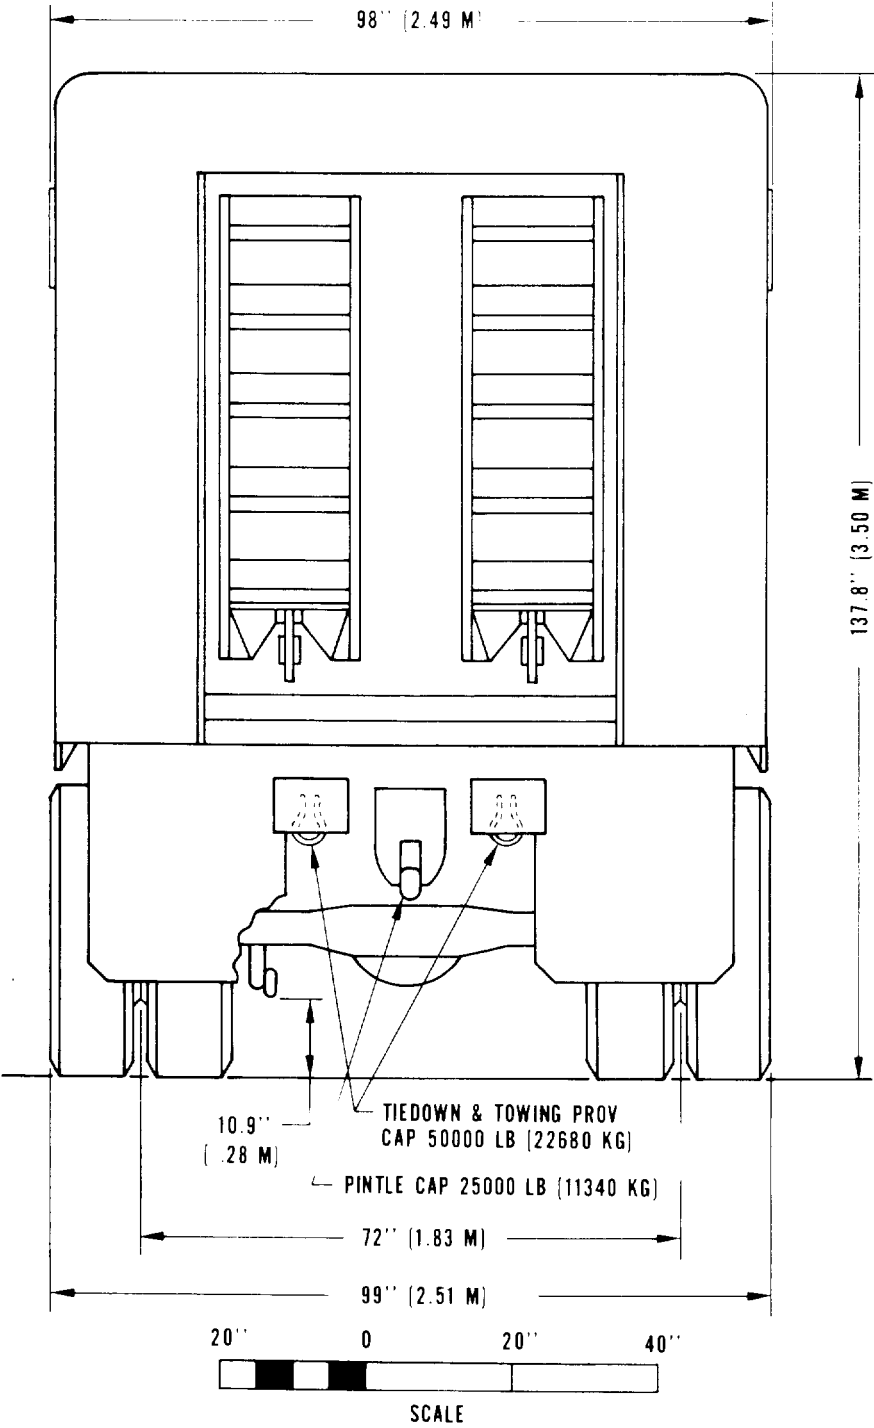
Rear elevation, truck, van, expansible, M291A2.
